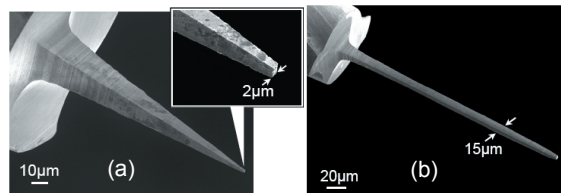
Overviews of produced micro-tools under optimum machining conditions: (a) Ultra precise tool (b) Extremely large aspect ratio micro-tool [155].
